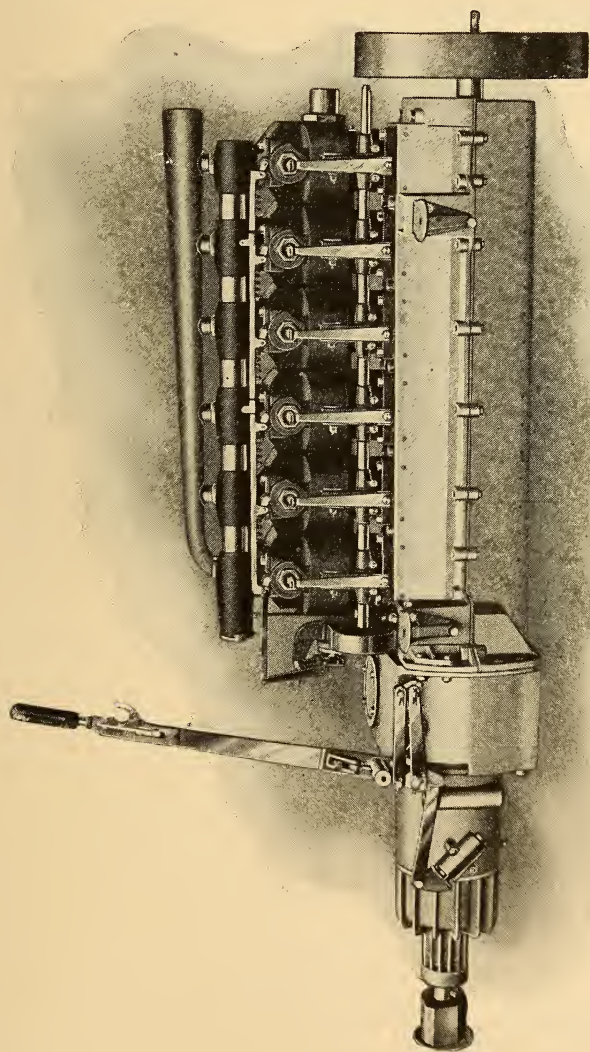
28 H.P. Six-cylinder Lanchester Engine.
